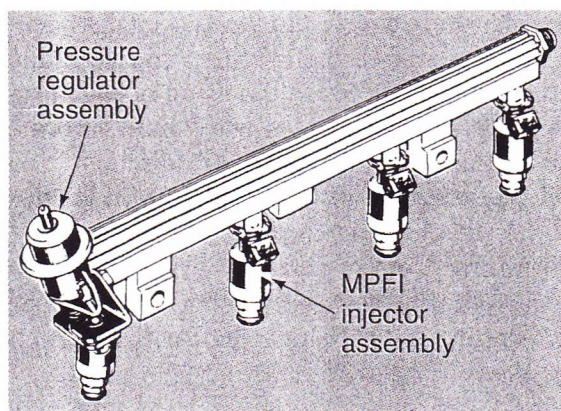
Fuel rail with fuel pressure regulator and fuel injectors for a four-cylinder port fuel injected engine. *Courtesy of Oldsmobile Division, General Motors Corporation
